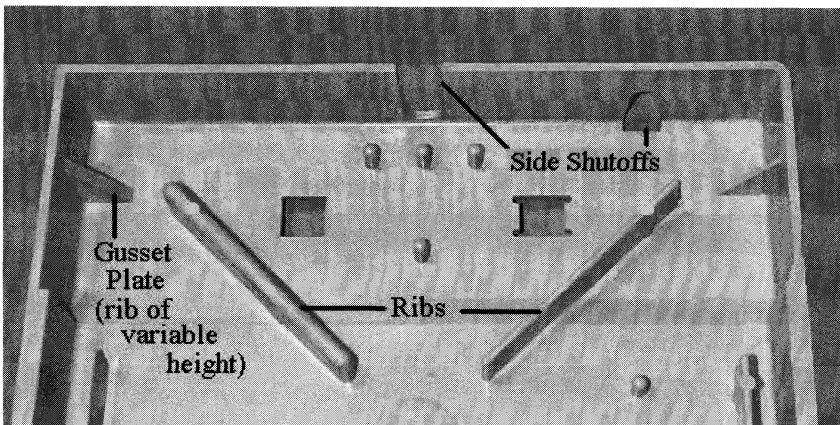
Photograph of an injection-molded part showing ribs and shutoffs.
